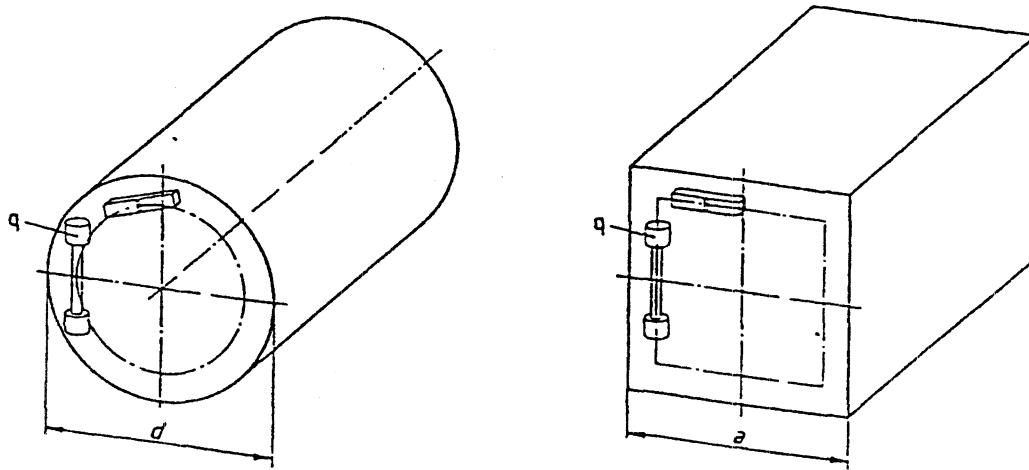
Position of test pieces for steel bars > 160 mm diameter or thickness (transverse test pieces)
